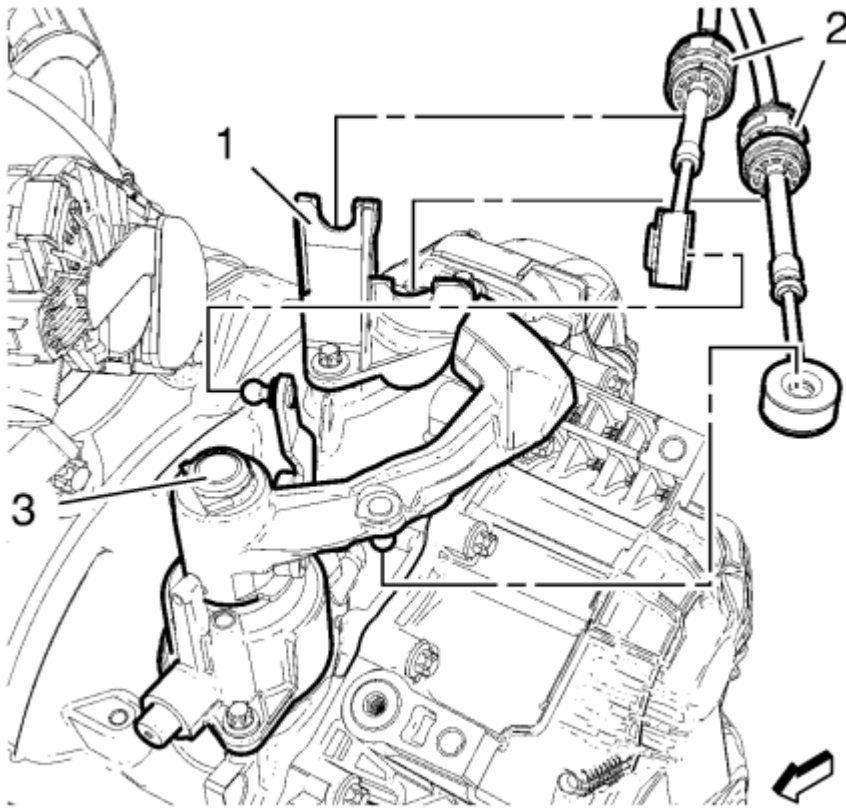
Selector Lever Cable, Bracket And Transmission Control Housing
